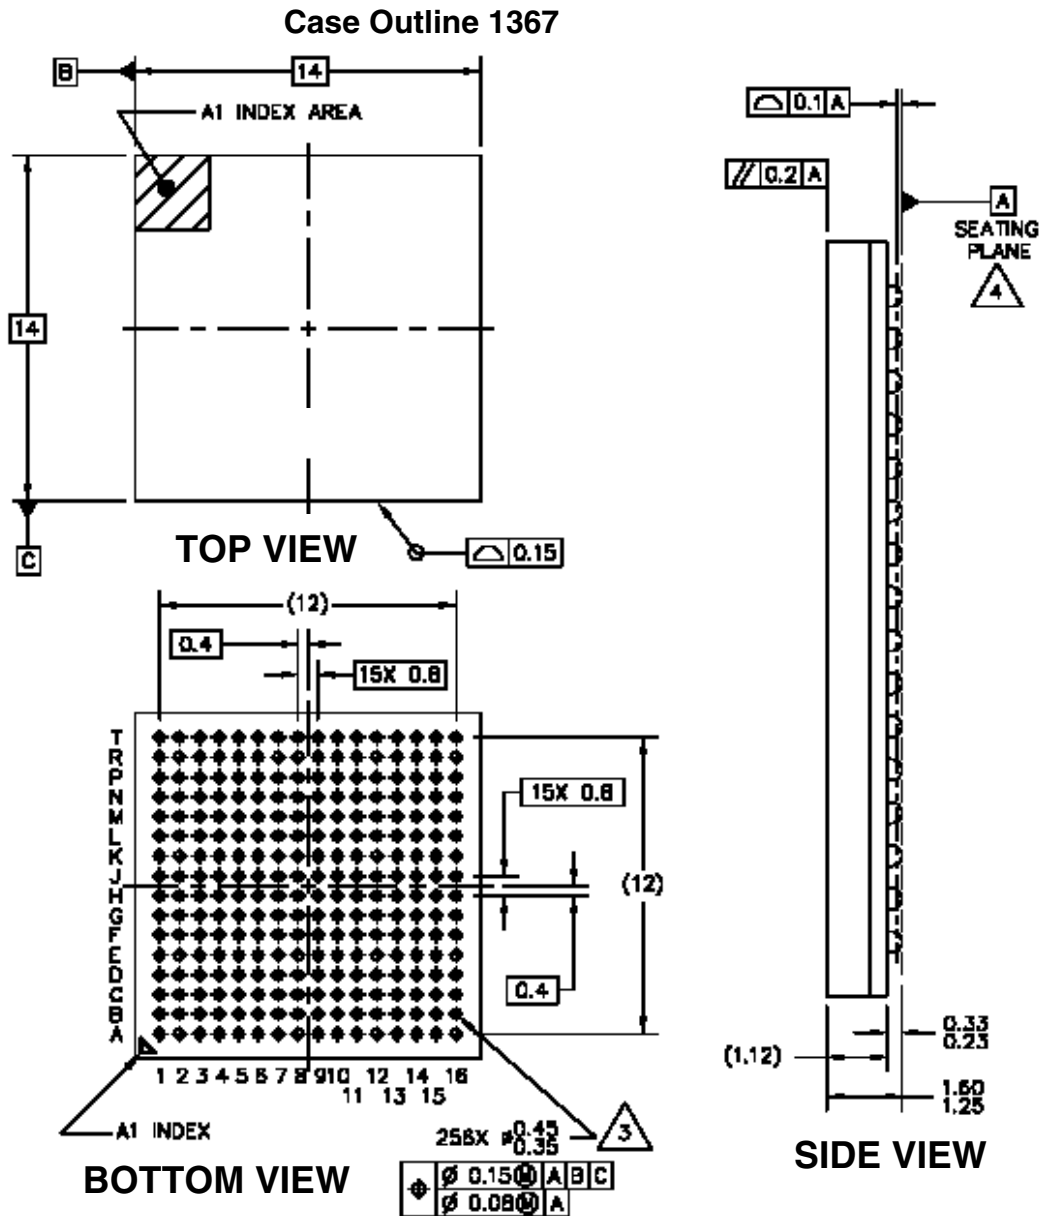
i.MXL 256 MAPBGA Mechanical Drawing
